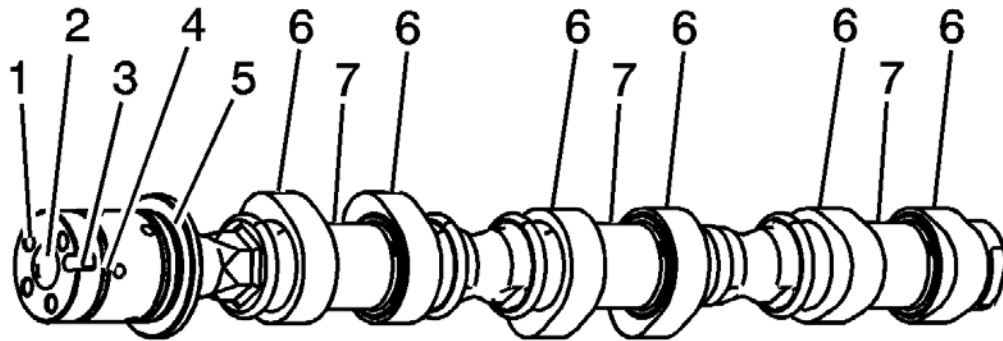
Identifying Camshaft Inspection Areas
